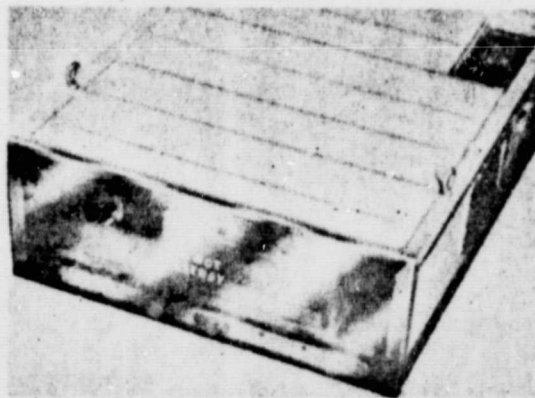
Block I(0)/I(100) AGC Handling Fixture
